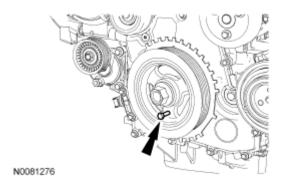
Identifying 6 mm x 18 mm Bolt Courtesy of FORD MOTOR CO.
